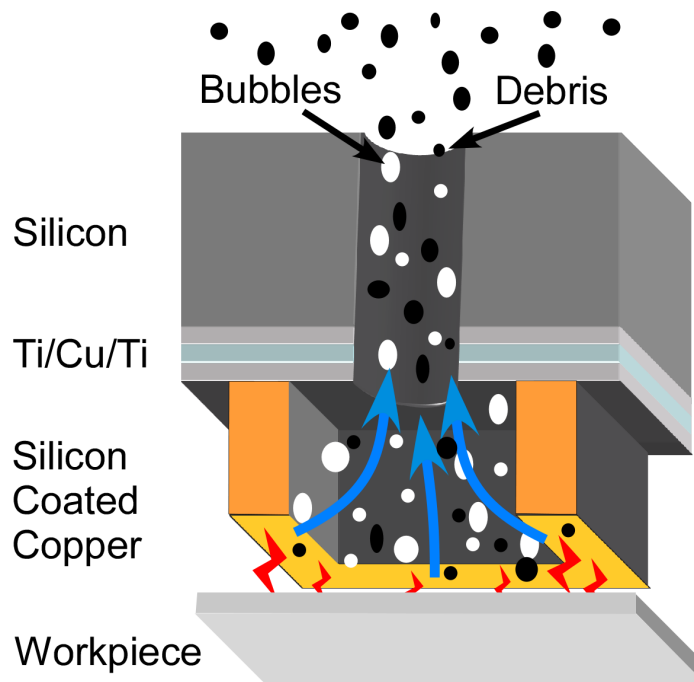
Integrated through-tool hydraulic flushing for high density batch  $\mu$ EDM would allow debris to escape without requiring a through-workpiece machining step.
